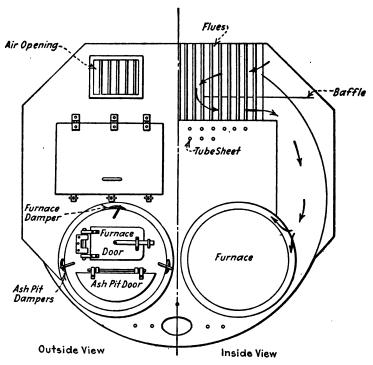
Sketch Showing Two Furnace Scotch Boiler Equipped with Howdens Forced Draft
